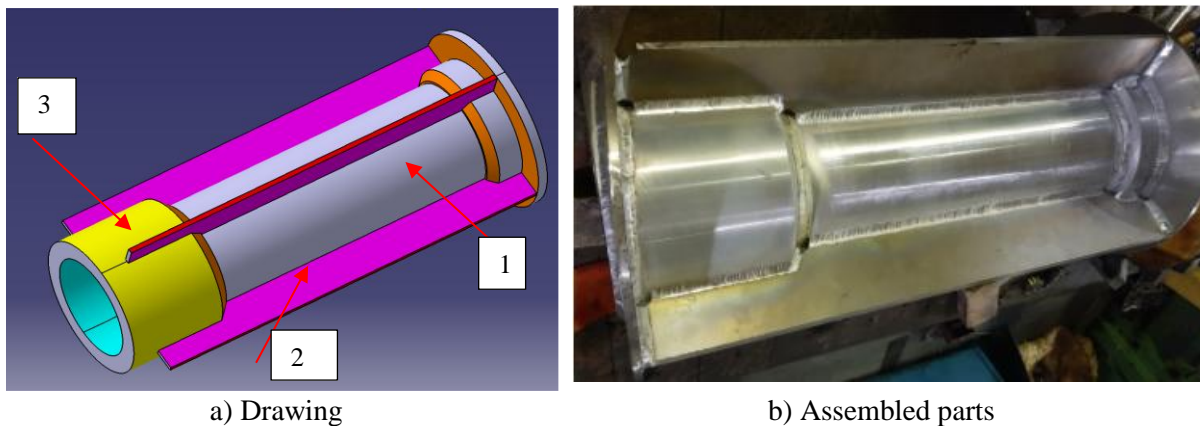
Guide bushing; 1) guide tube, 2) stiffening wings, 3) upper bushing.
